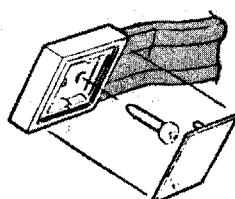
Typical Door Pull Handle Attachment - Cadillac "C" Styles
